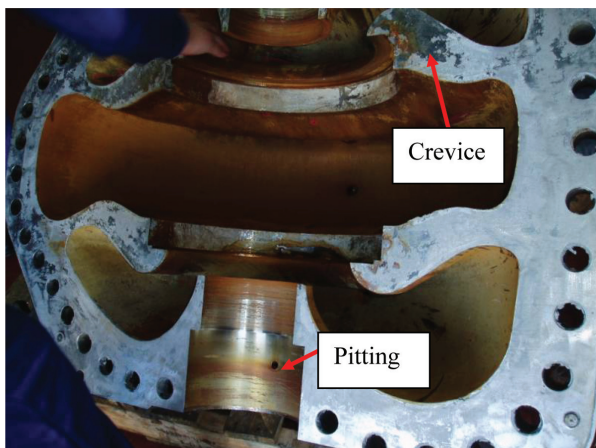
Crevice and pitting corrosion of the casing of a HP booster pump (cast duplex stainless steel 1.4468).
